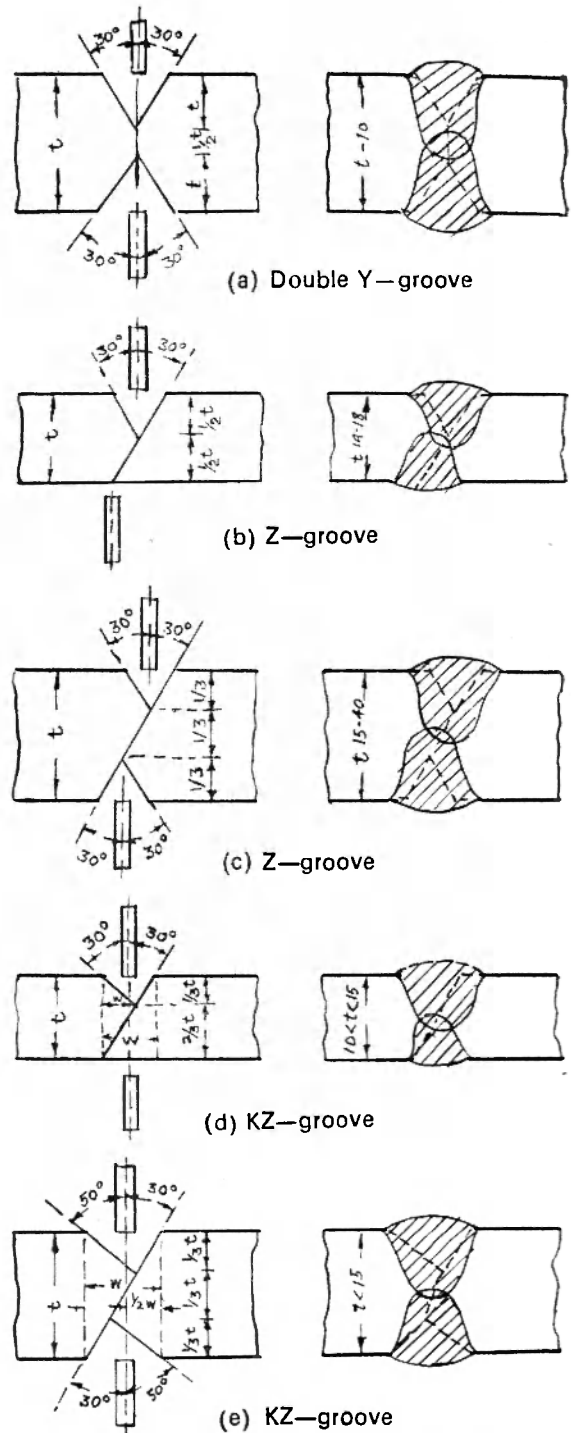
Different types of Groove form in submerged arc welding.
